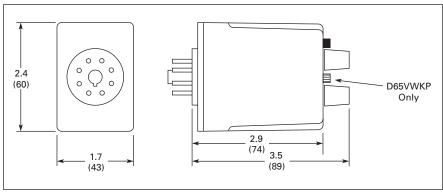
D65V Series — Approximate Dimensions in Inches (mm)
